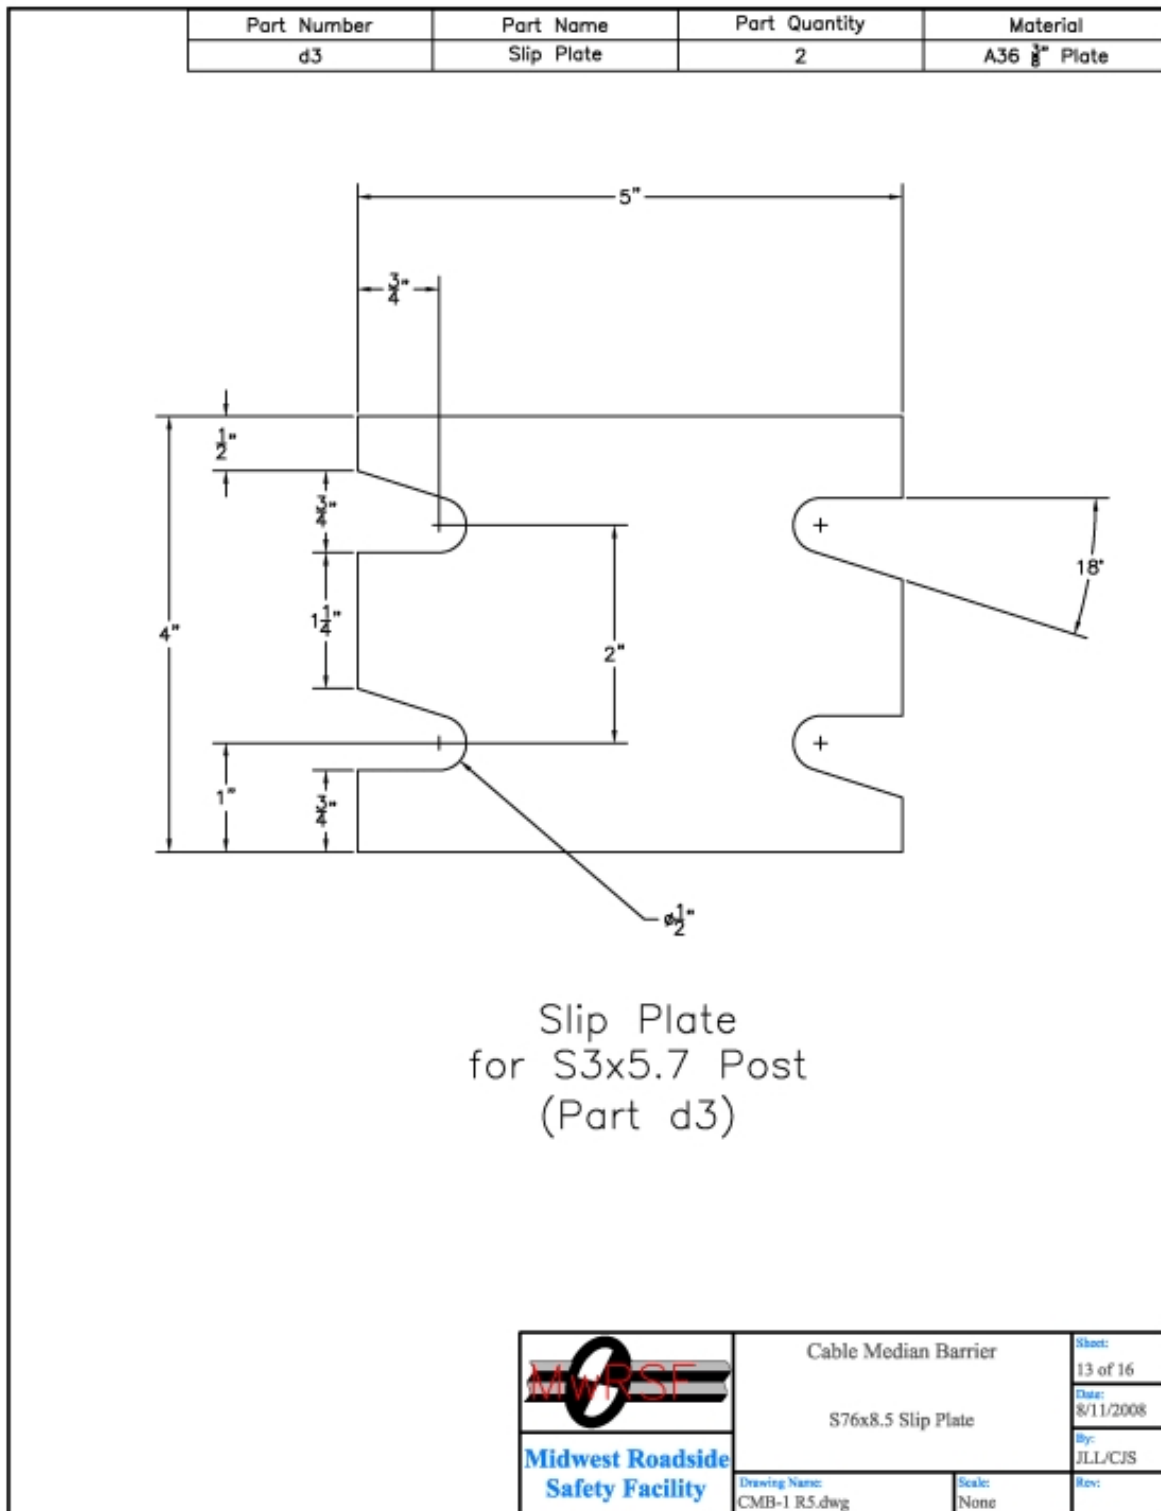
Cable Bracket Slip Plate (English), Design No. 1
